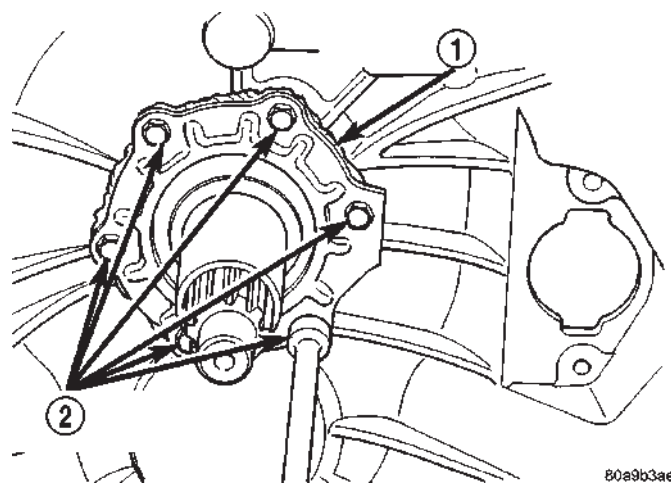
Input Shaft Bearing Retainer Bolts - Typical
